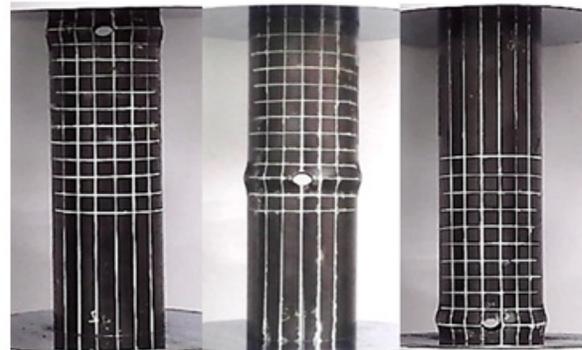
The collapse of tube with holes when the initiator buckling started at the same location of holes.
